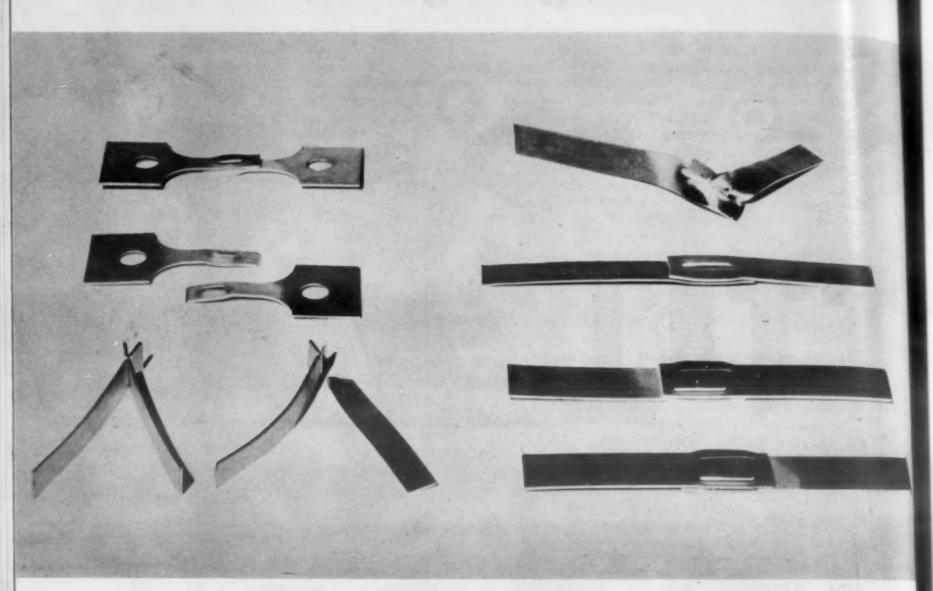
Test specimens of aluminum welds made by the cold welding process.
